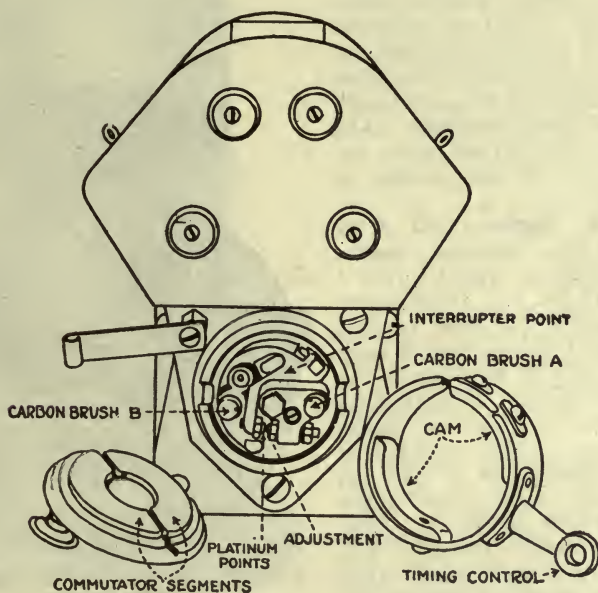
"DU4" Duplex Magneto partly disassembled.
